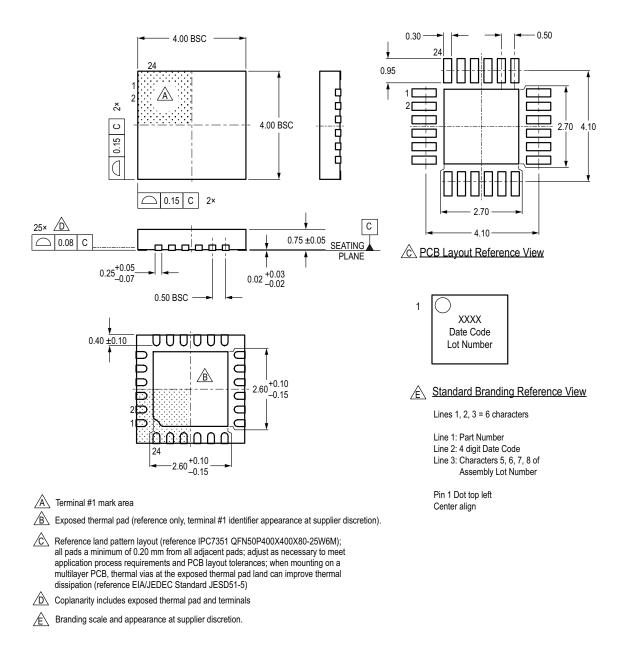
Package ES, 24-Contact QFN with Exposed Pad
